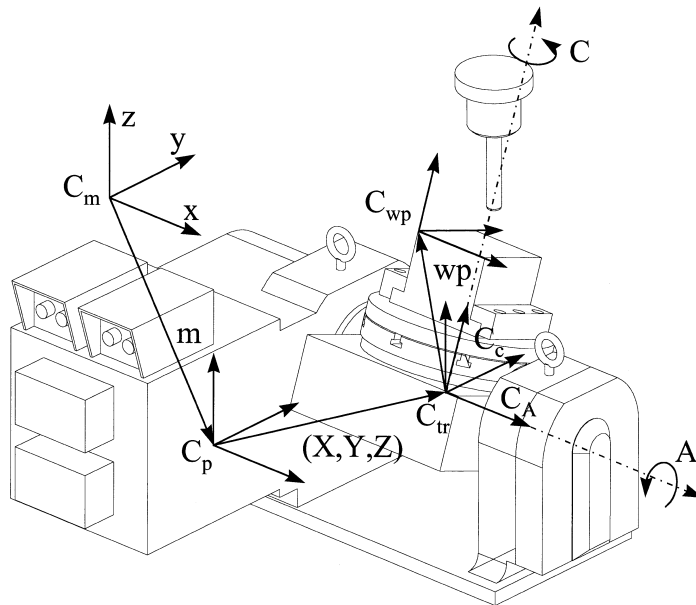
Kinematics of a tilt rotary table type 5-axis machine.
